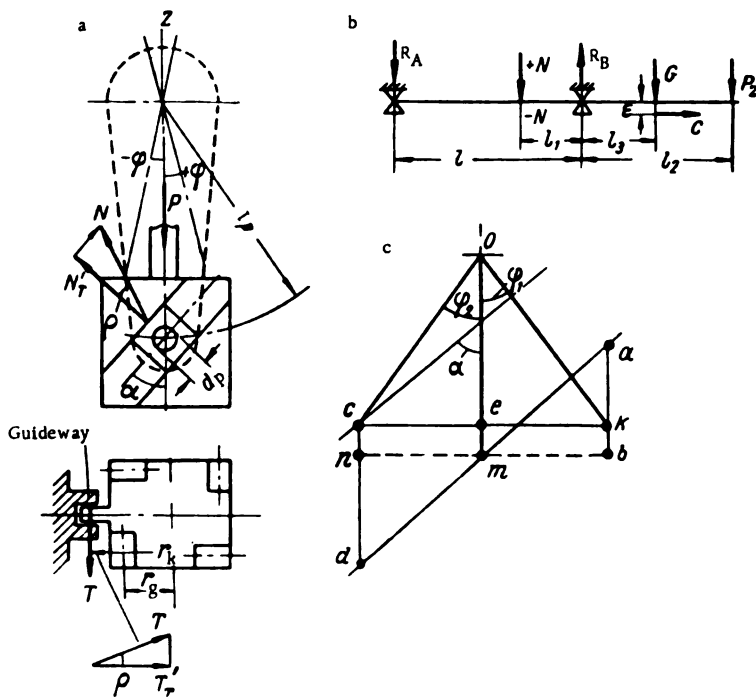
Diagram of the blade-actuating mechanism with slide-block drive
